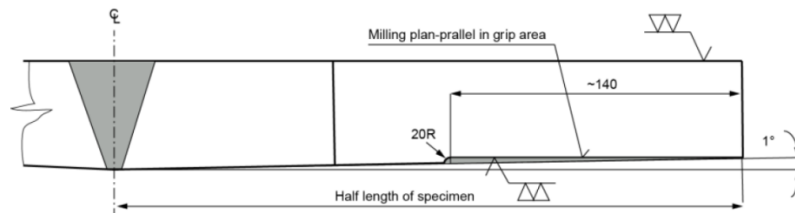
Milling of the Clamping Area (DNV GL 2015)
